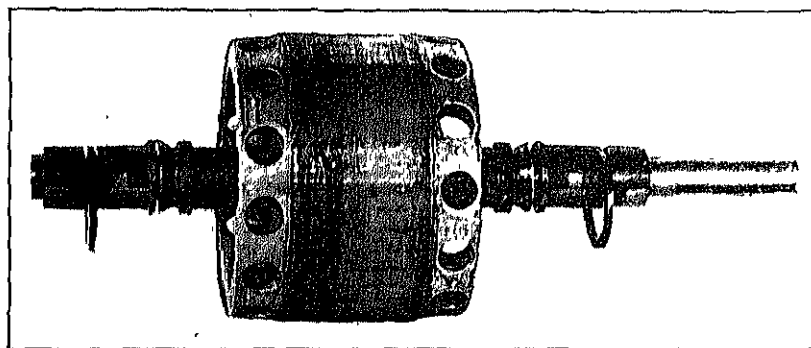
Complete rotor with cast squirrel-cage winding.
